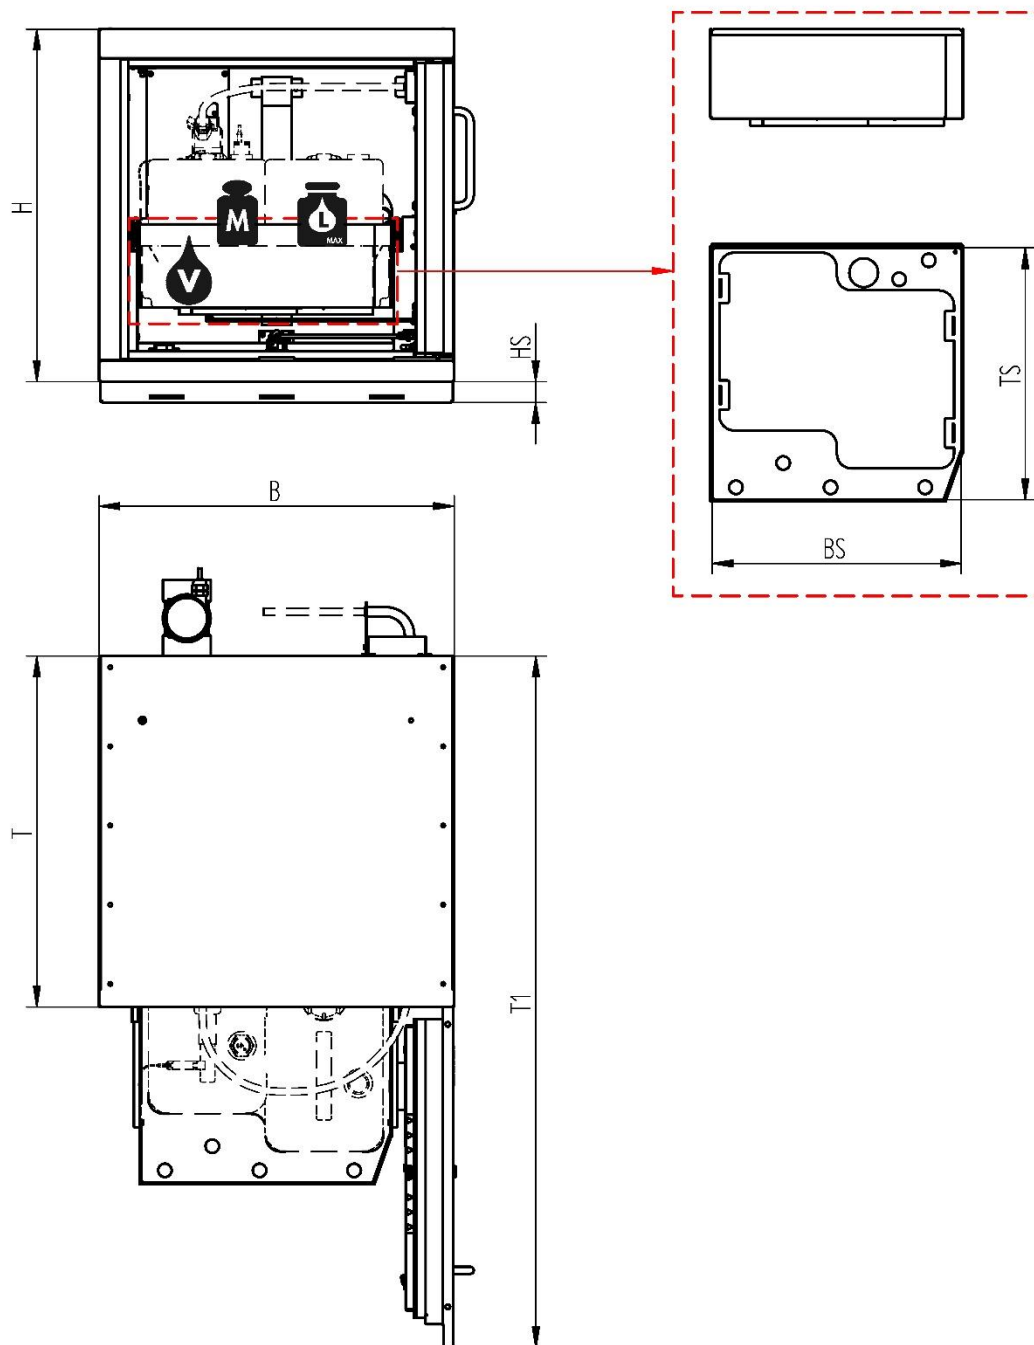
DISPOSAL UTS ergo and DISPOSAL BENCH dimensions
